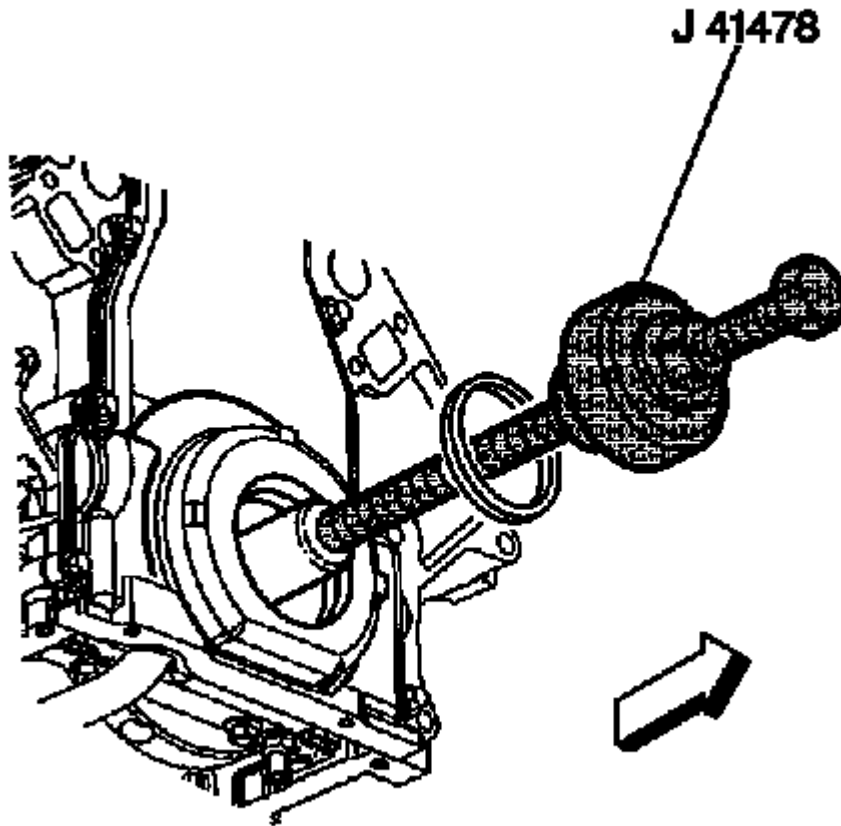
Installing The Crankshaft Front Oil Seal Using J 41478
